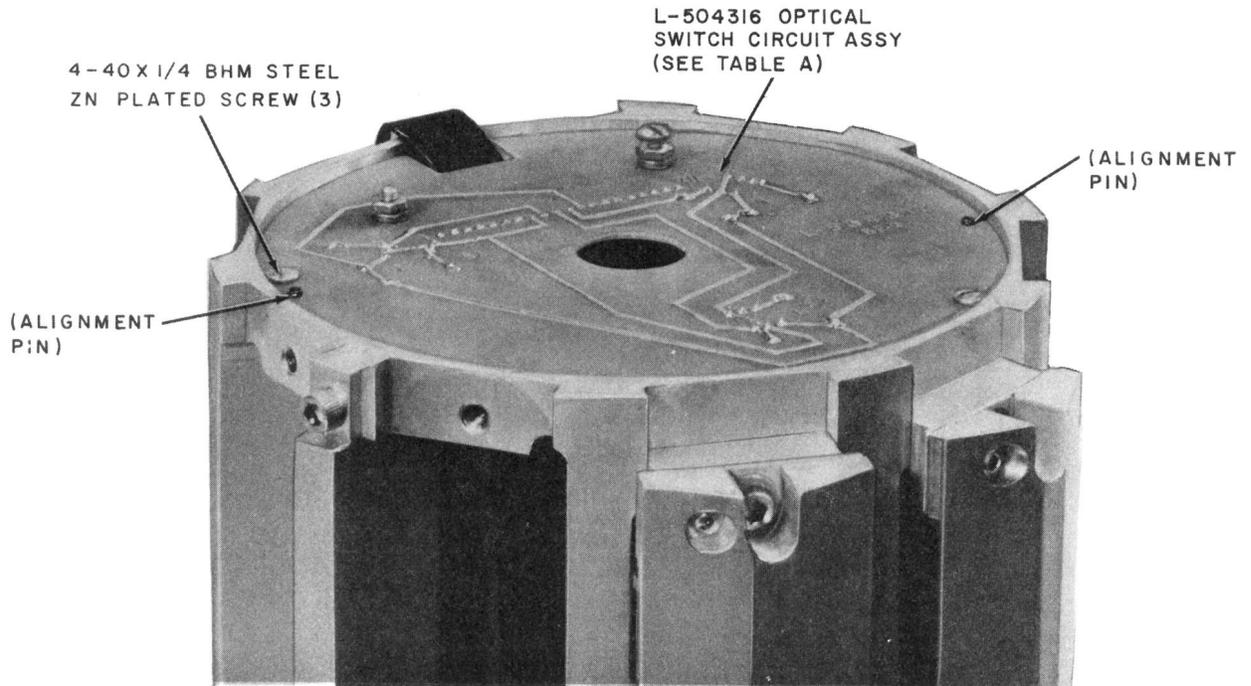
Top of Recorder Unit With Dust Cover Removed—Equipped With L-504316 Optical Switch Assembly
